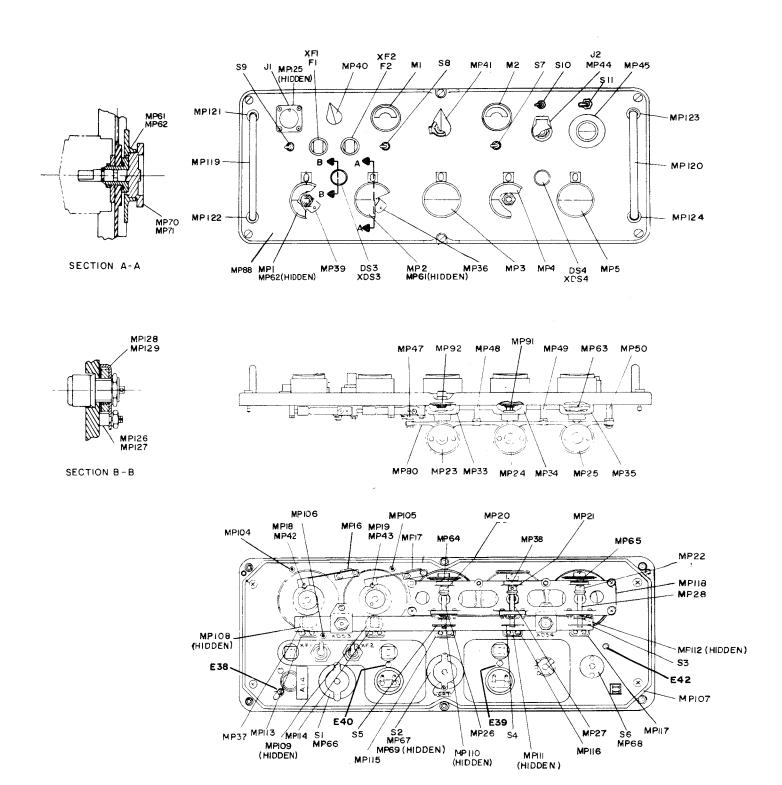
Front Panel Assembly (P/O A2), Component Locations
